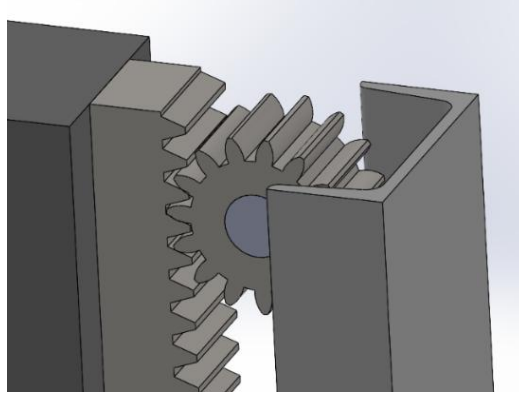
Isometric detail of the rack-and-pinion mesh.
